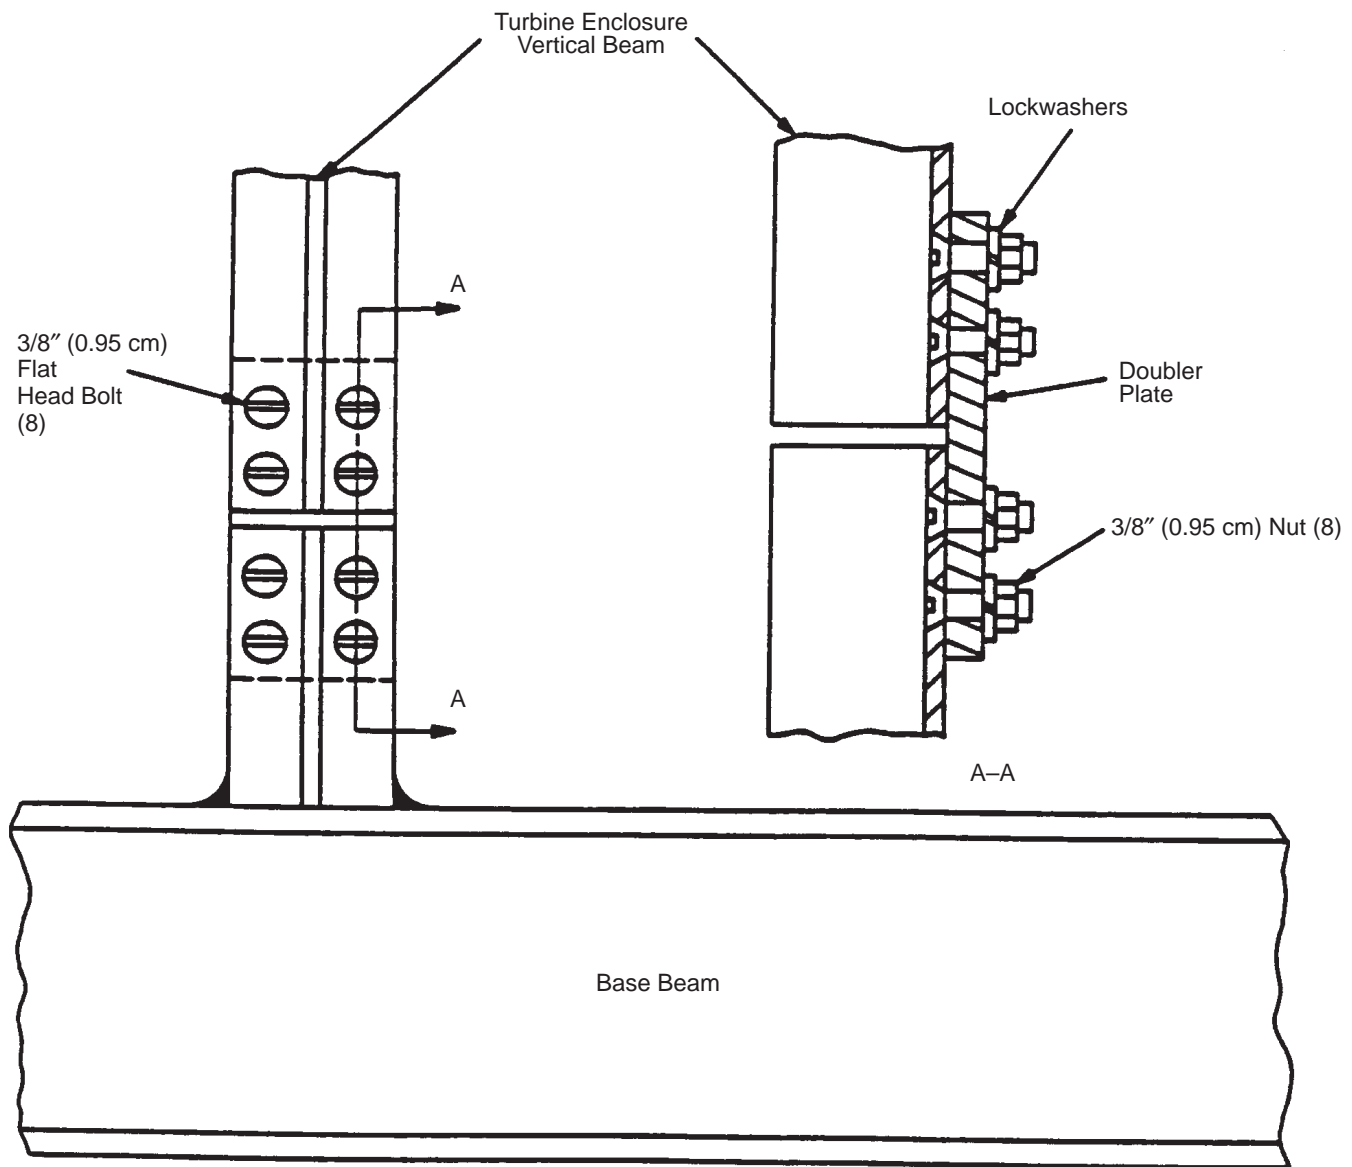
Doubler Plates and Bolts Used During Re-assembly.
